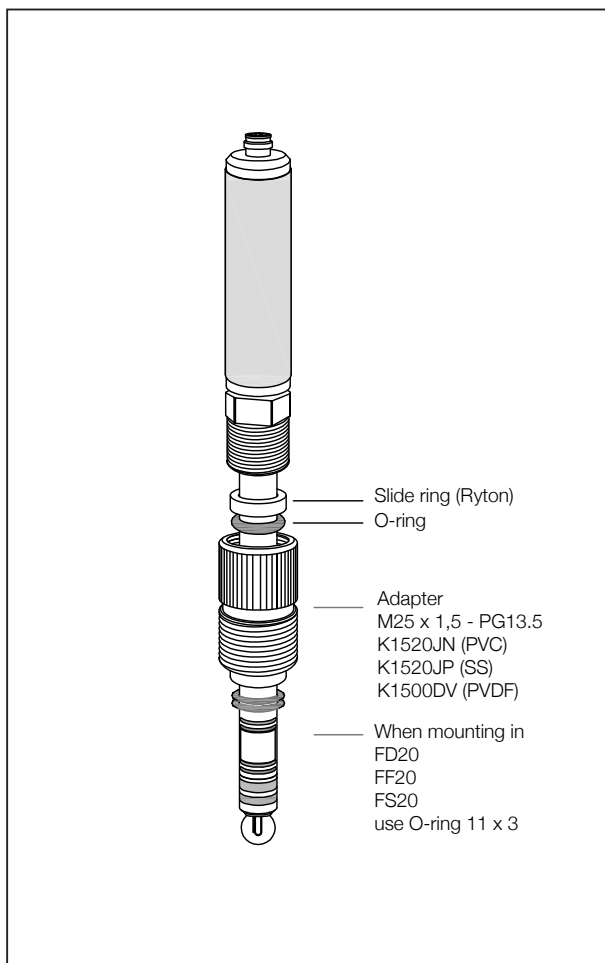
Mounting of sensor in FD20/FF20/FS20 fitting using M25x1.5 adapter K1500DV/ K1520JN / K1520JP
